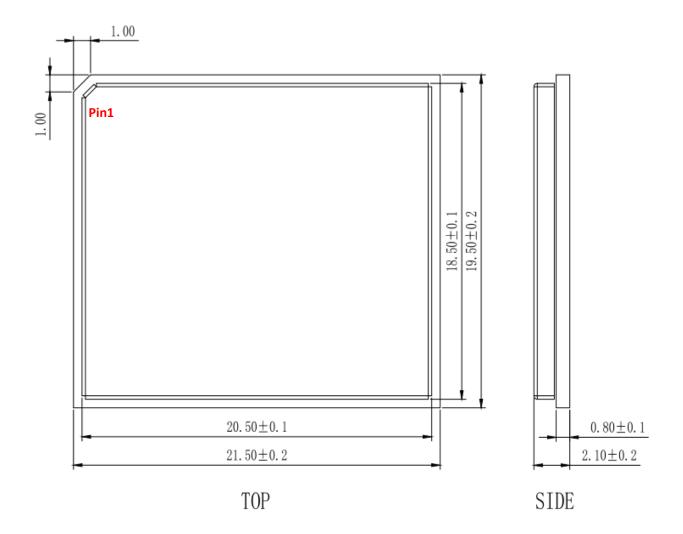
FG50V Top and Side Dimensions (Top and Side View)
